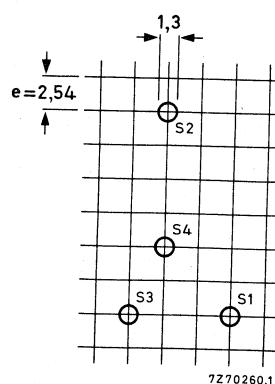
Hole pattern for mounting on a printed-wiring board (solder side).
